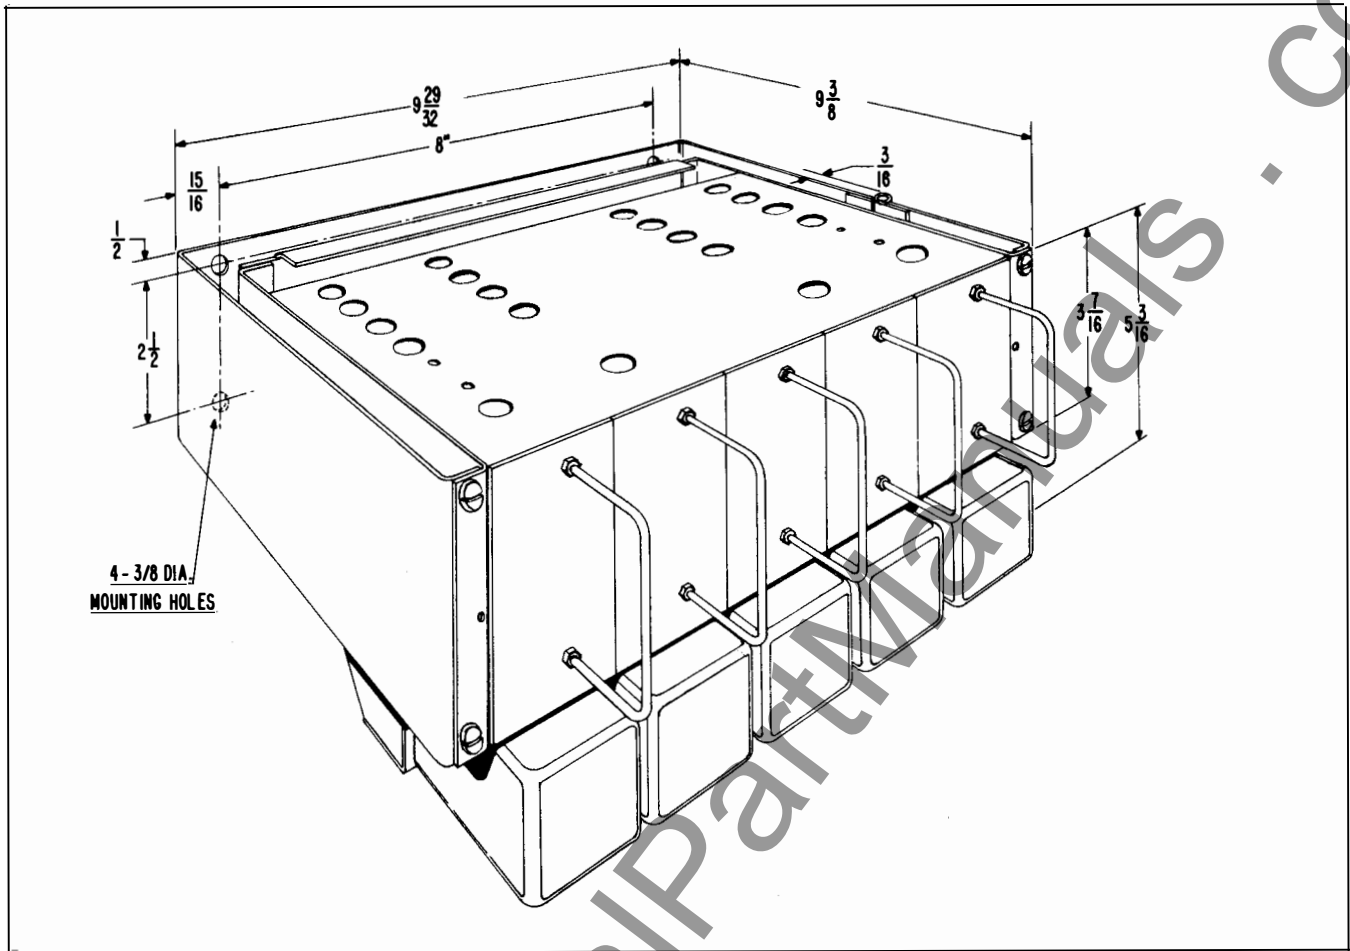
Outline and Drilling Plan of 5 Module Chassis
